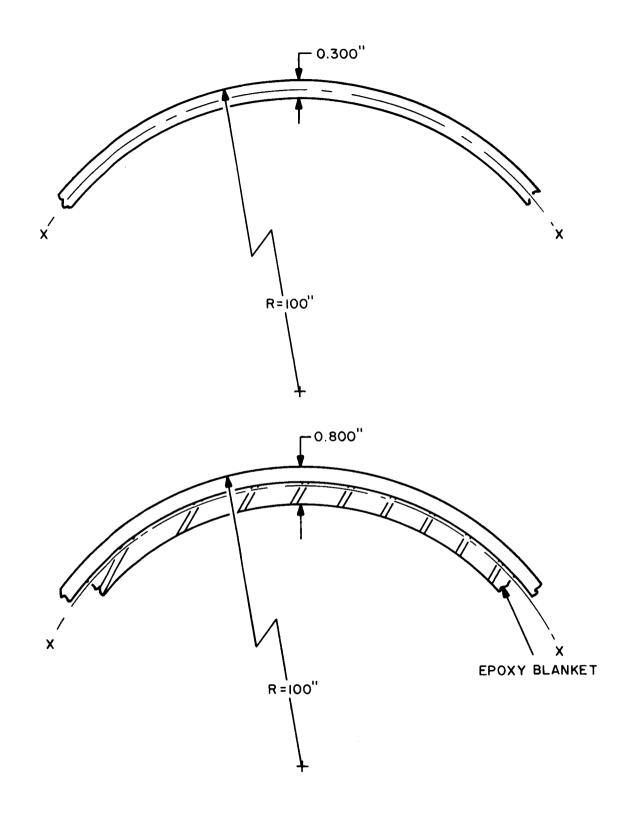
USE OF EPOXY BLANKET FOR EXPLOSIVE FORMING
